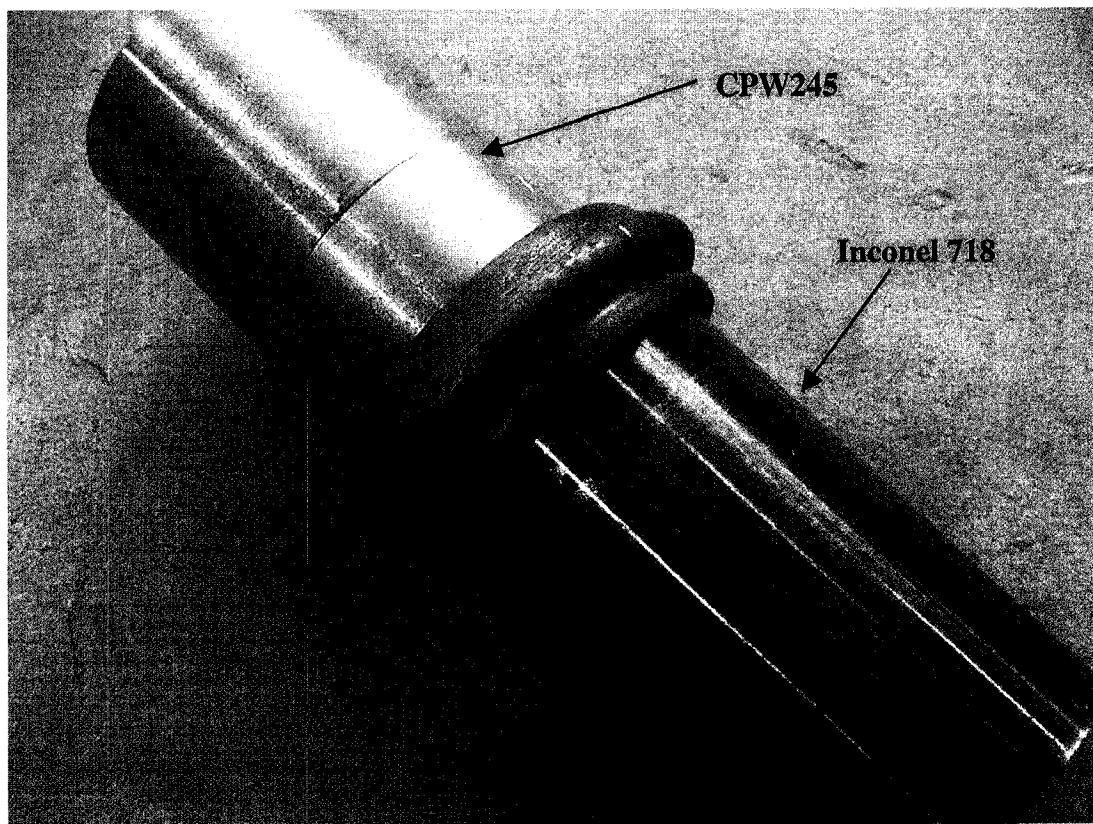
IW1 - First test pieces pair being friction welded
